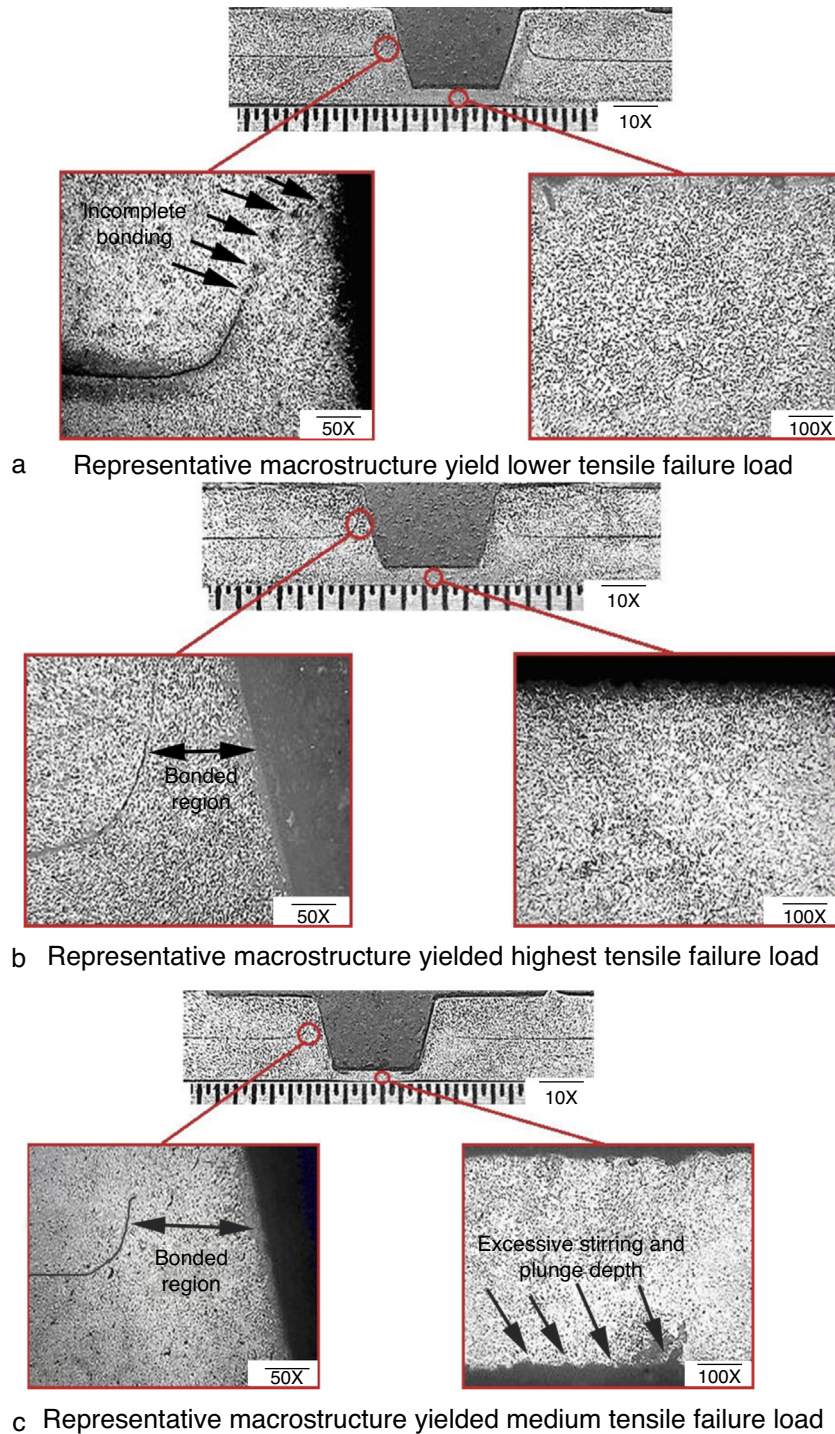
Macrostructure of friction stir spot welded low carbon automotive steel.
